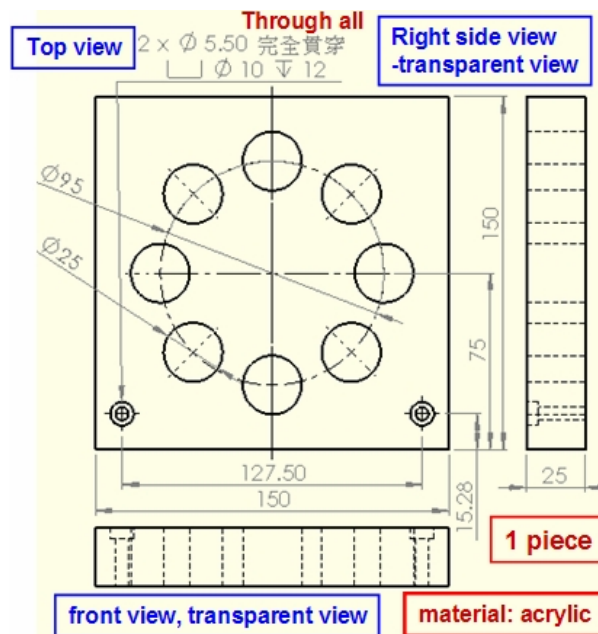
Engineering drawing for the 8-hole acrylic work cylinder holder
